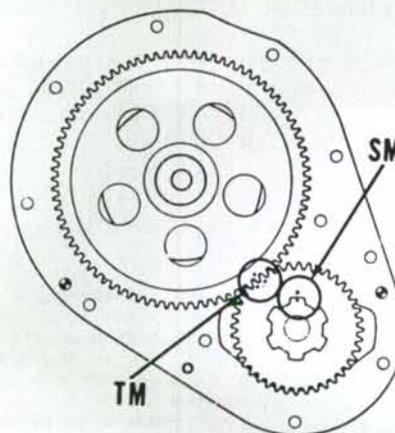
View showing timing gears used on Models 1190 and 1194. Install crankshaft gear with spline marks (SM) aligned as shown. Install camshaft gear with "D" or punch marked tooth between the two punch marked teeth of crankshaft gear as shown at (TM).
